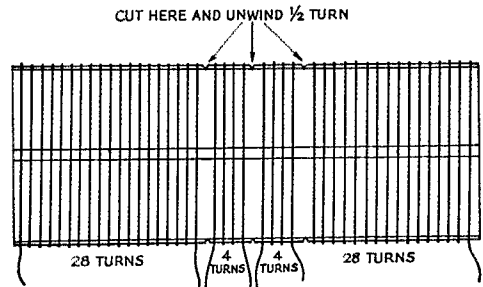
This drawing shows how to make the coil assembly. Not shown are the taps needed for changing bands. The tap points listed below all are counted from the outside ends of the coil.
